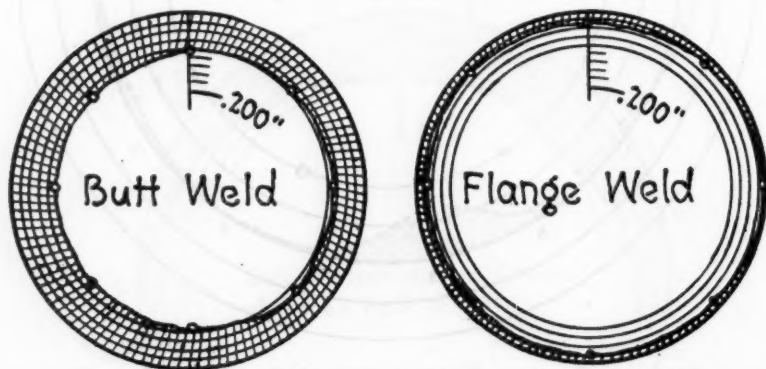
COMPARATIVE DEFORMATIONS IN BUTT WELDS AND FLANGE WELDS IN 16-INCH BY  $\frac{1}{4}$ -INCH PIPE
